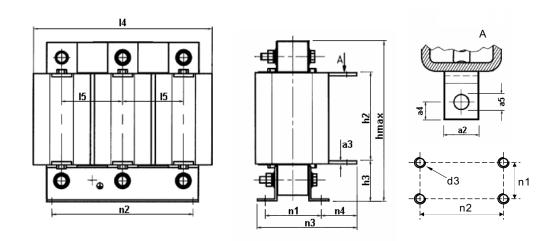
Mounting dimensions, motor reactors, frame sizes FSD / FSE / FSF
